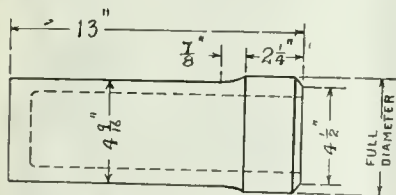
DIMENSIONS OF FORGING READY FOR NOSING-IN HAMMER.
